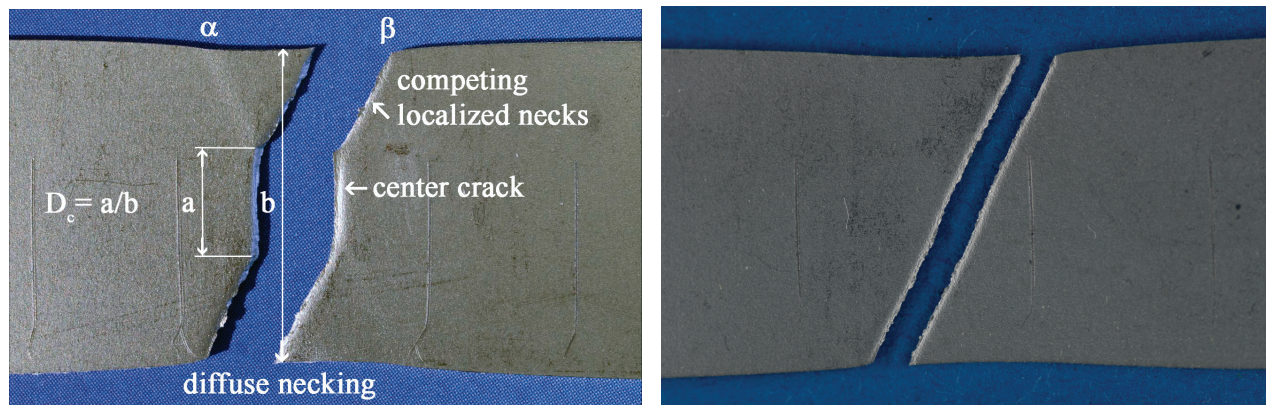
Examples of failures of AISI 304 alloy in a tensile test. Both failures, including a center crack and subsequent necking (left) and necking without a preceding crack (right), were observed.
